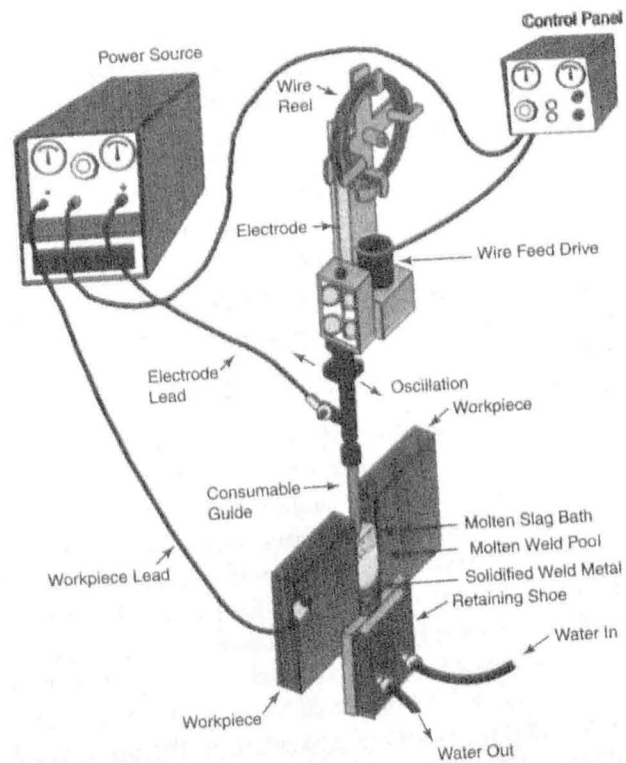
The ESW consumable guide system. Courtesy of Welding Inspection Technology, American Welding Society.
